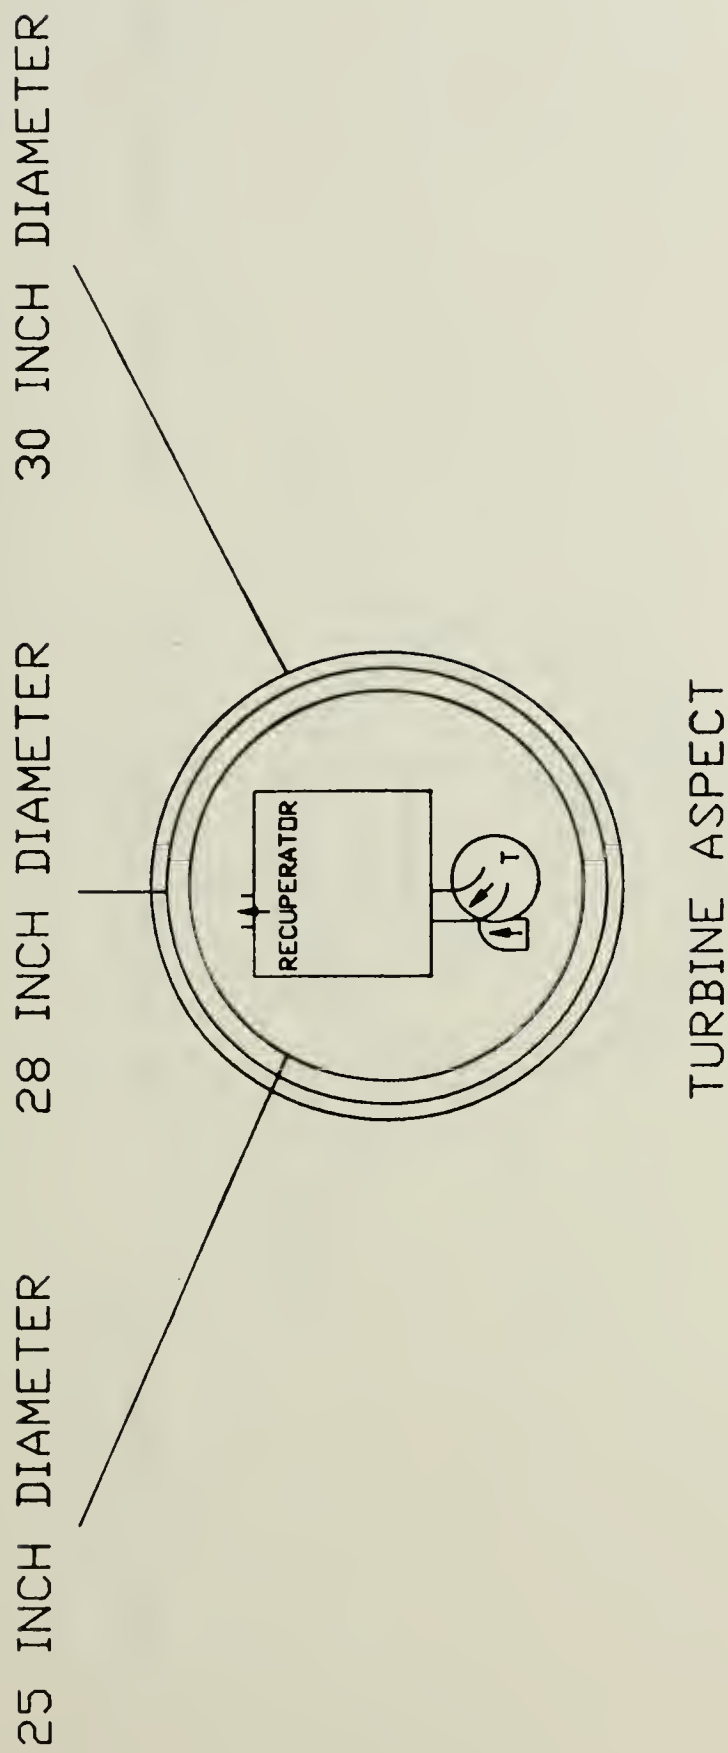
CROSS-SECTIONAL VIEW OF A 30 INCH DIAMETER VEHICLE
